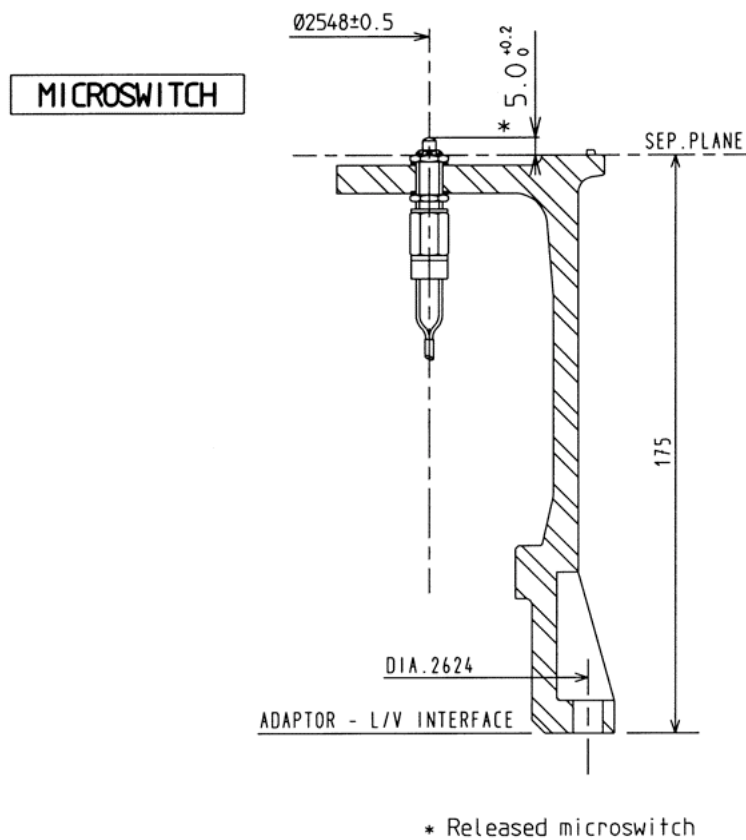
Adaptor 2624 Mechanical Interface (details)
